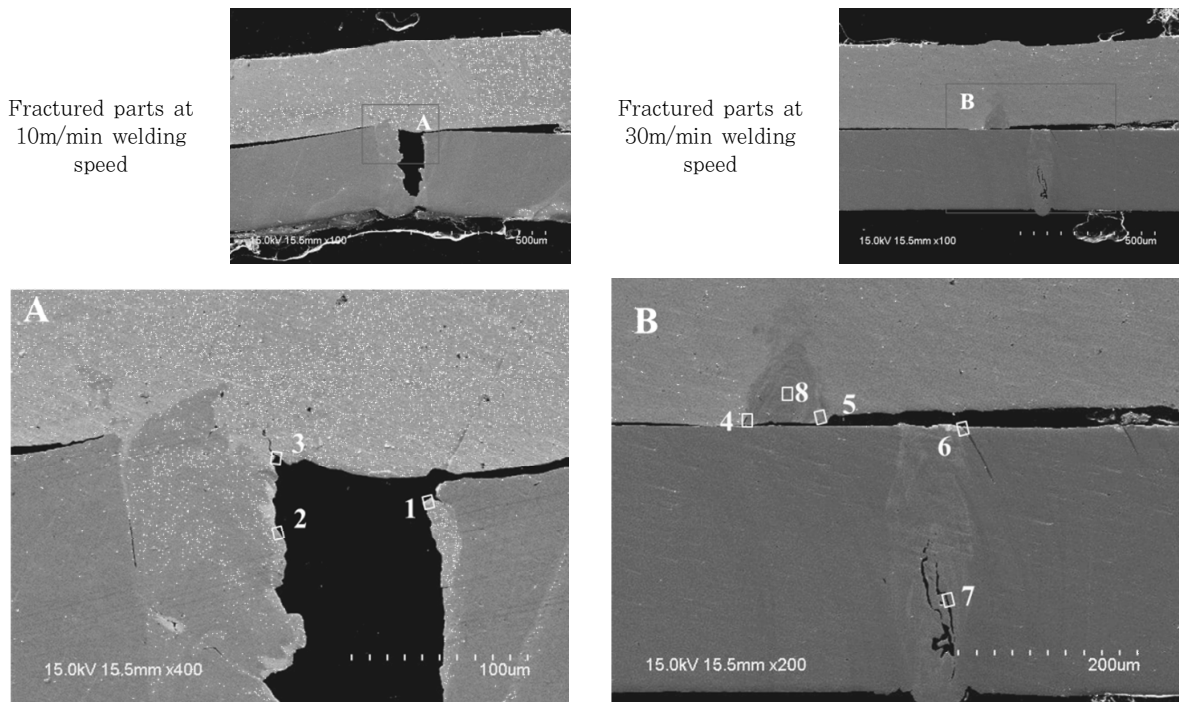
SEM cross-sectional photos and areas for EDX analyses of Cu (upper sheet) and SUS304 (lower sheet) dissimilar welds at 10 and 30 m/min after tensile shear test
